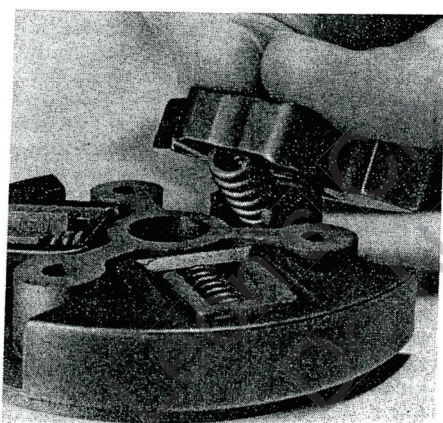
B—View showing easy method for installing late type clutch shoes and springs on clutch plate.
